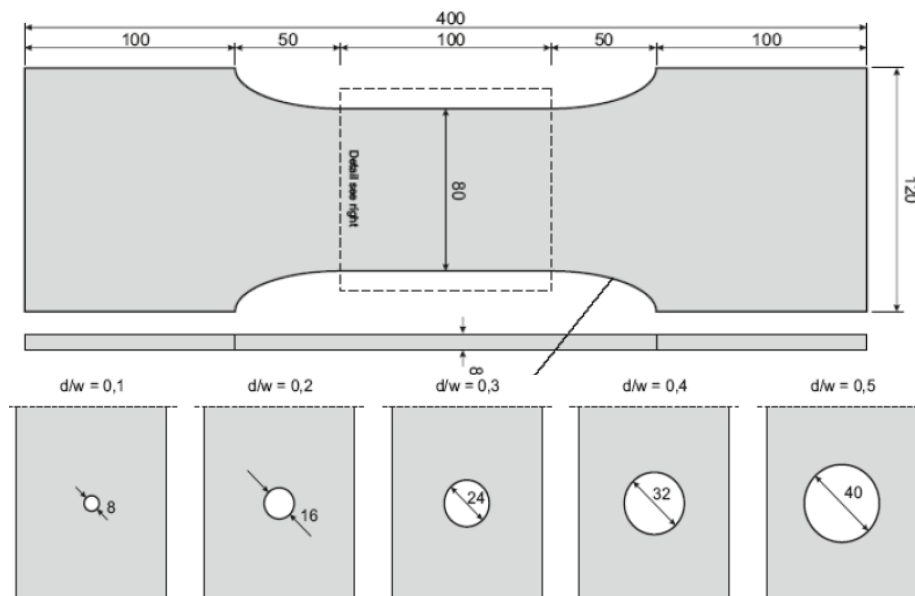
Shape of the CHT test specimen CHT-8 to CHT-40.
